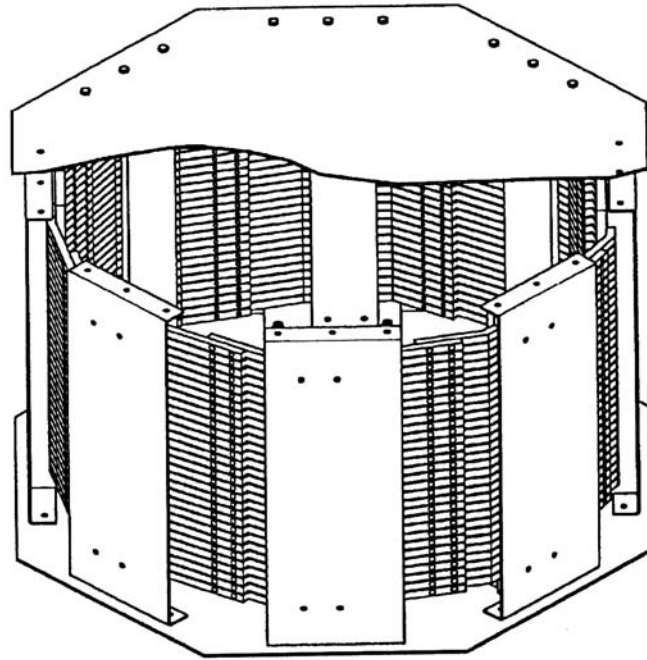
Design of the magnetic coil, with the copper rings.
